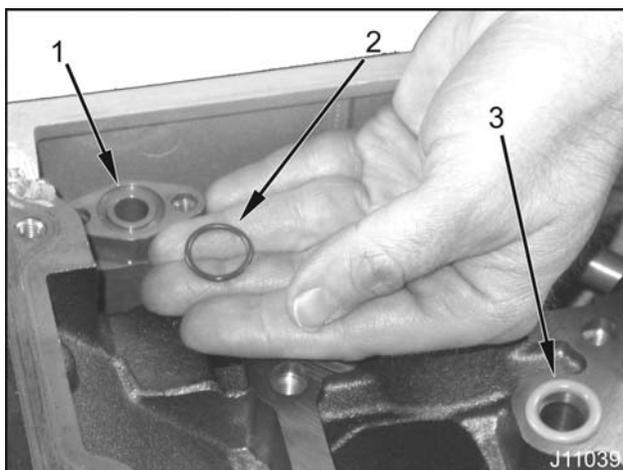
High-pressure oil pump inlet and branch tube adapter O-rings
